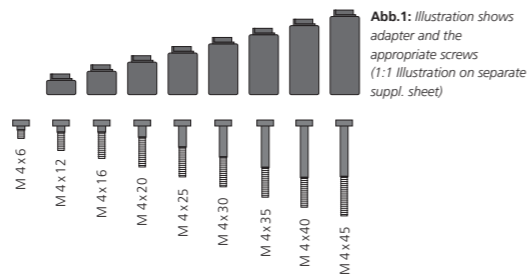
Illustration shows adapter and the appropriate screws (1:1 Illustration on separate suppl. sheet)
